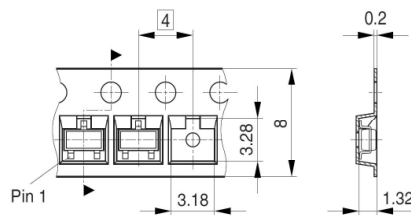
Outline PG-SC59-3, dimensions in mm/inches
